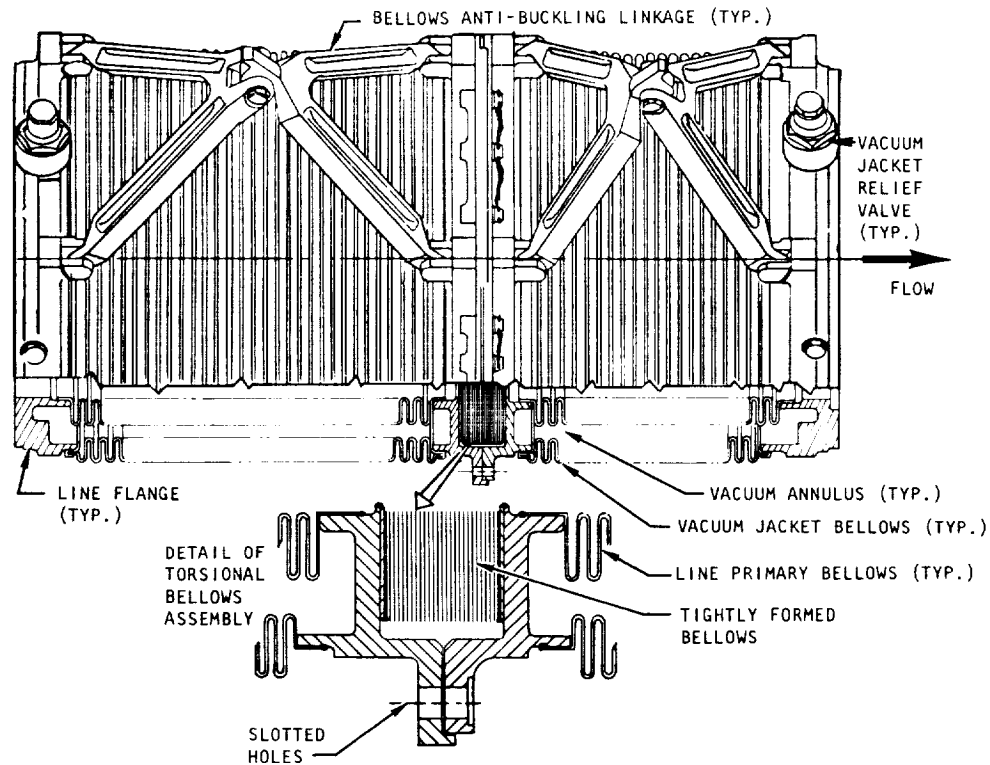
Tightly formed bellows subassembly used to absorb torsional deflection of primary bellows in inlet line of pump on J-2 engine.
